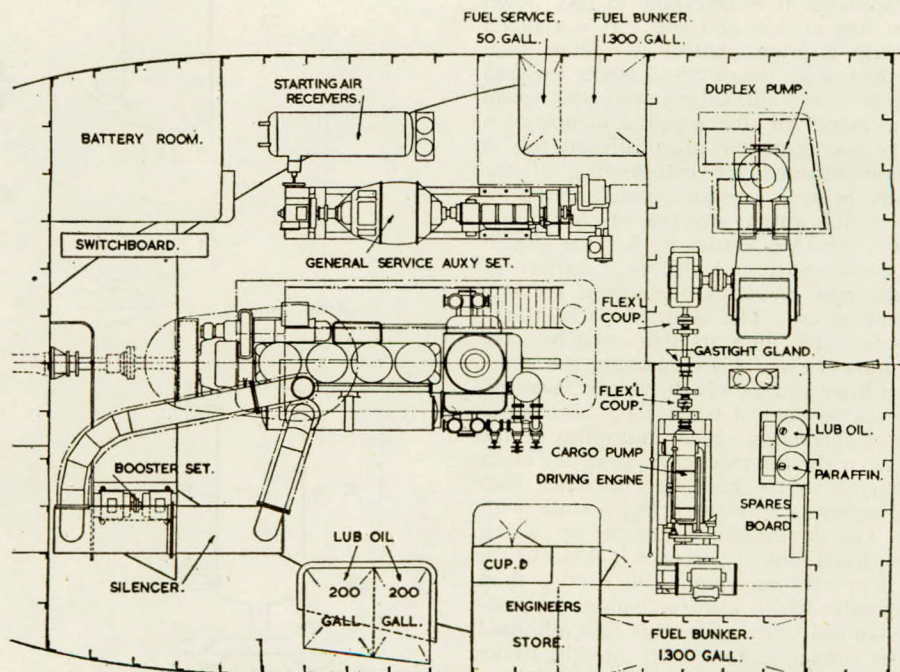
Machinery arrangement of the *Ben Harold Smith
